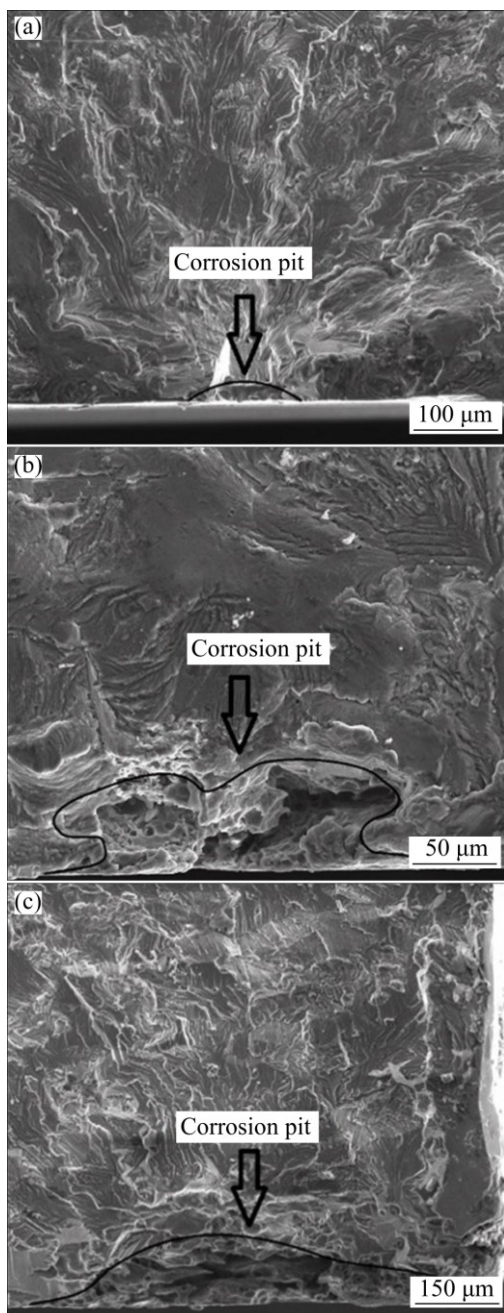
Fatigue fracture images of surface crack after being pre-corroded for 24 h (a), 240 h (b) and 480 h (c)
